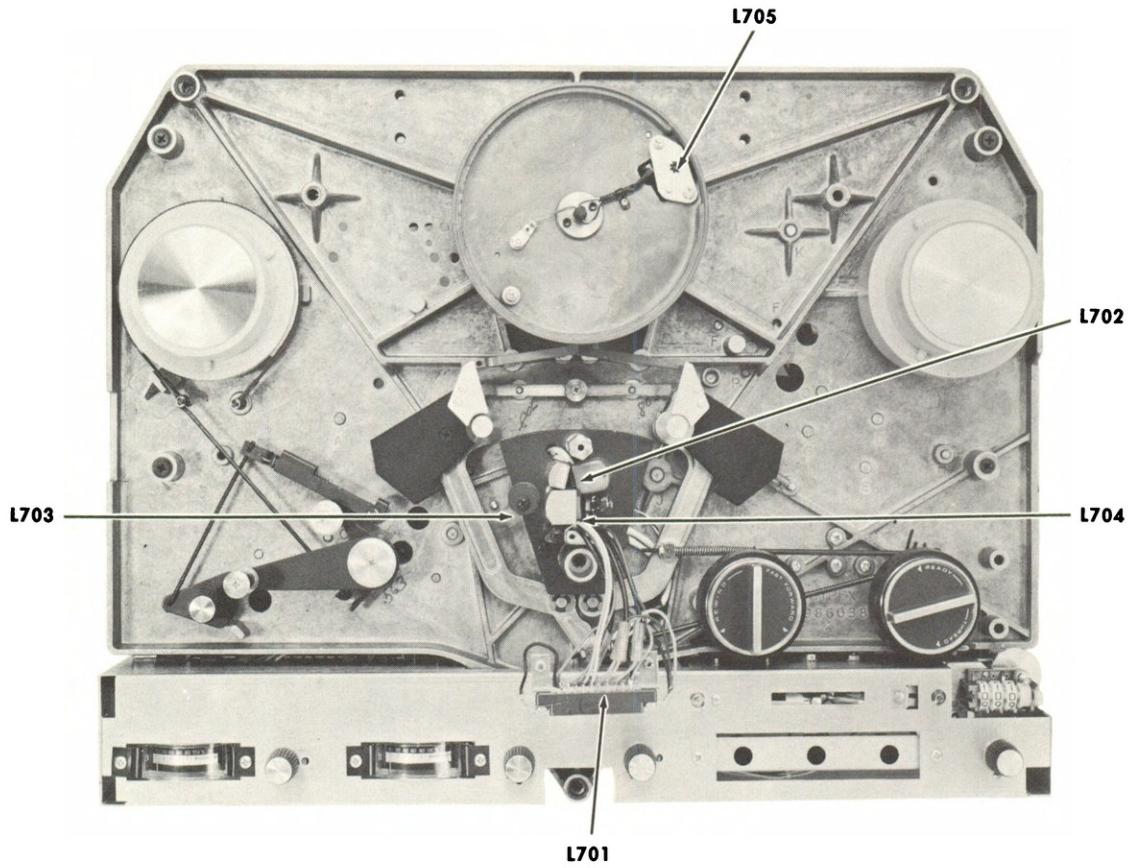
Electrical Parts Locator, Above Transport Assembly
